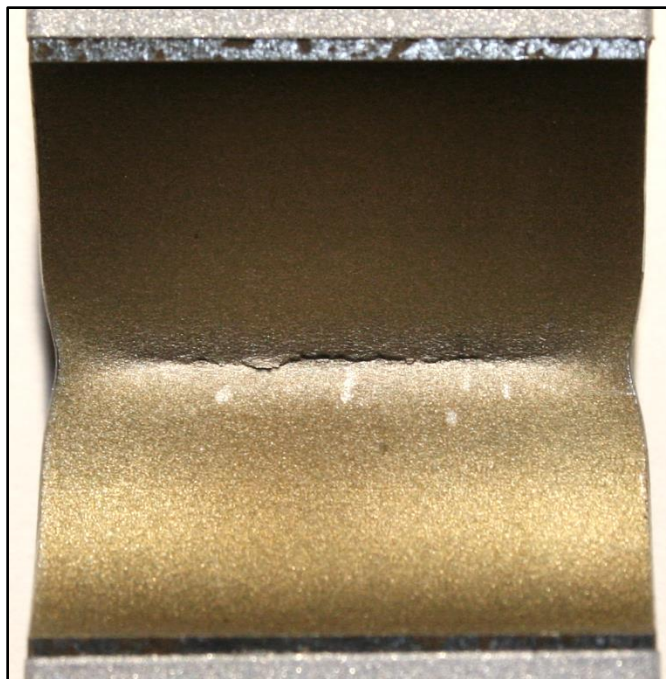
Thick Large Notched Specimen: Macro View of Typical Partial Failure
